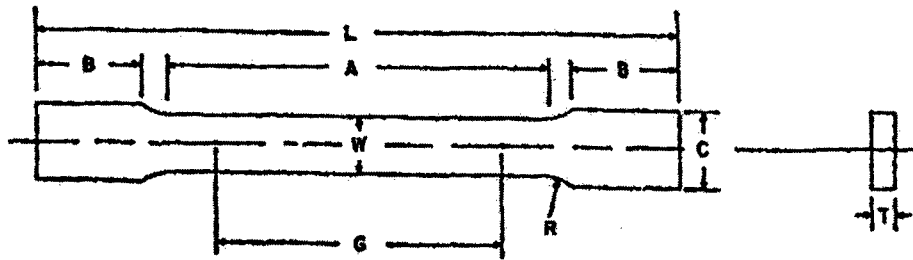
ASTM E8M specimen for flat-sheet tensile samples.
